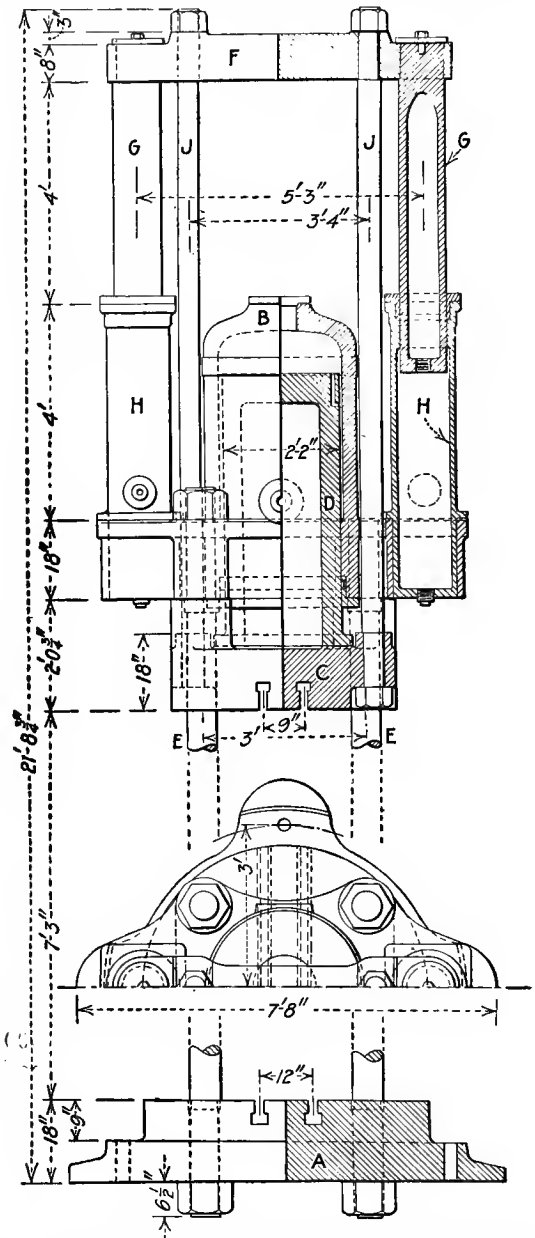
ASSEMBLED CROSS-SECTIONAL VIEW OF 26x45-IN. SHELL-FORGING PRESS
